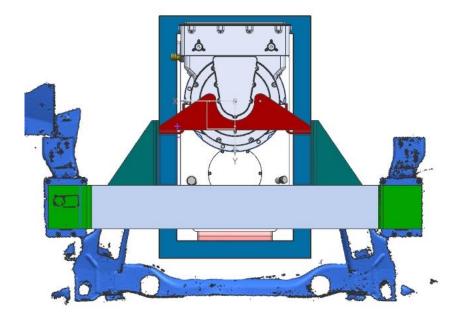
Front view of the powertrain sub frame with the motor and gearbox assembled
